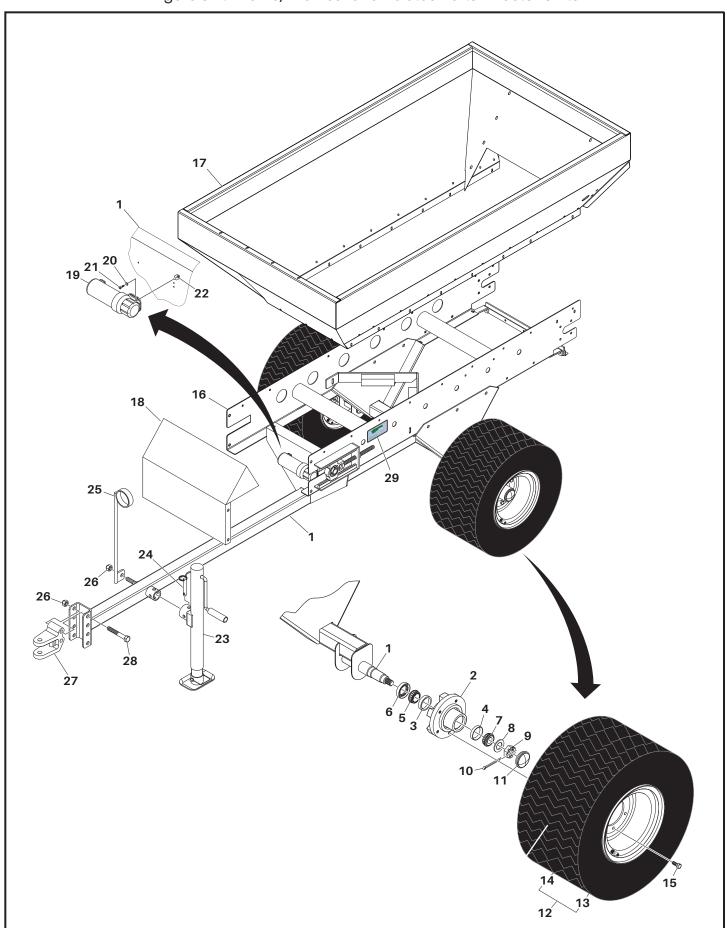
Frame, Drawbar and Related Parts - Tractor Units
